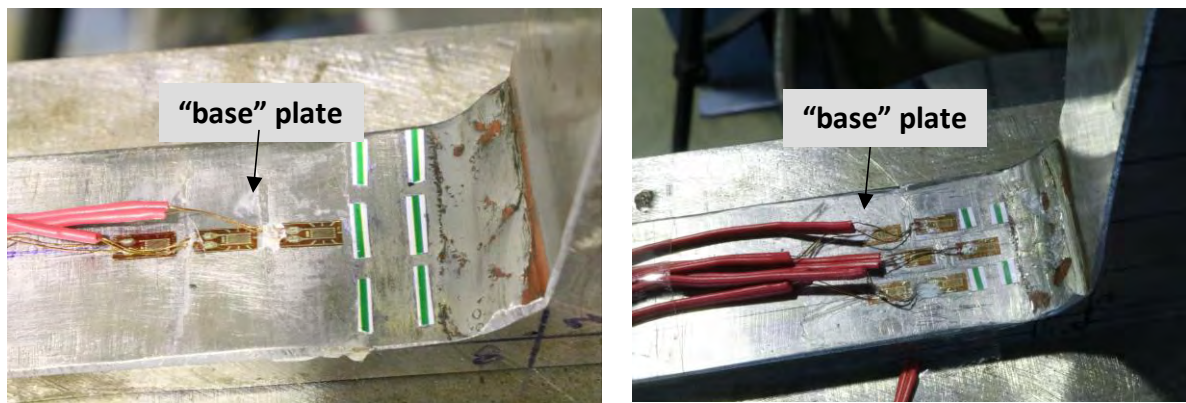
General view of a typical specimen, extracted from the large-scale welds.
